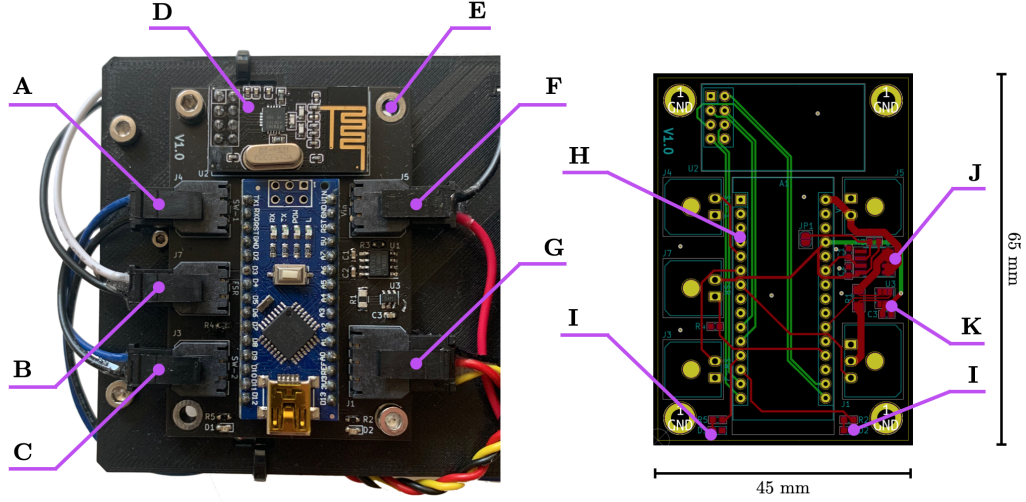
Cap Manipulator PCB Board: (Left) Assembled Board with Wiring, (Right) Board Layout with Hidden Fill Zones
